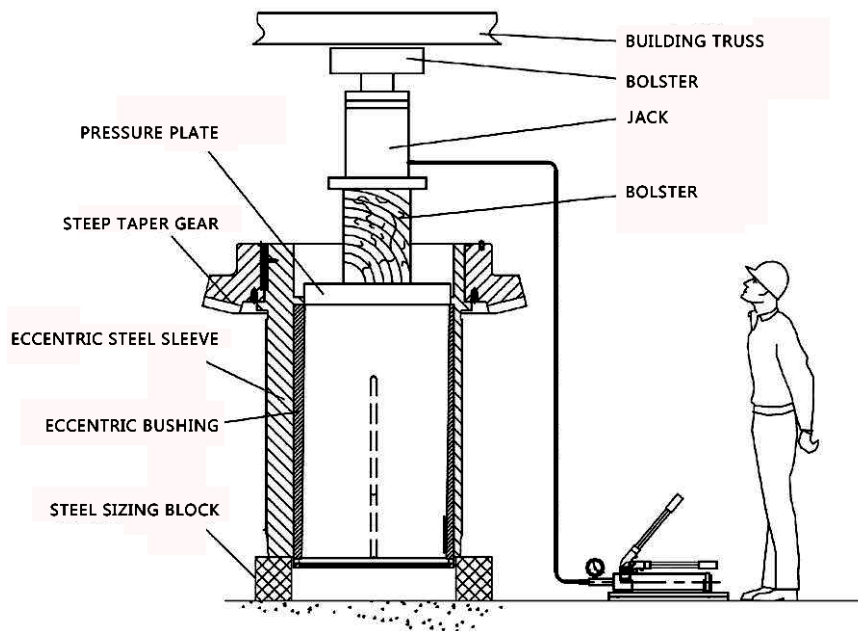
Disassembly instructions for the eccentric bushing of crusher
